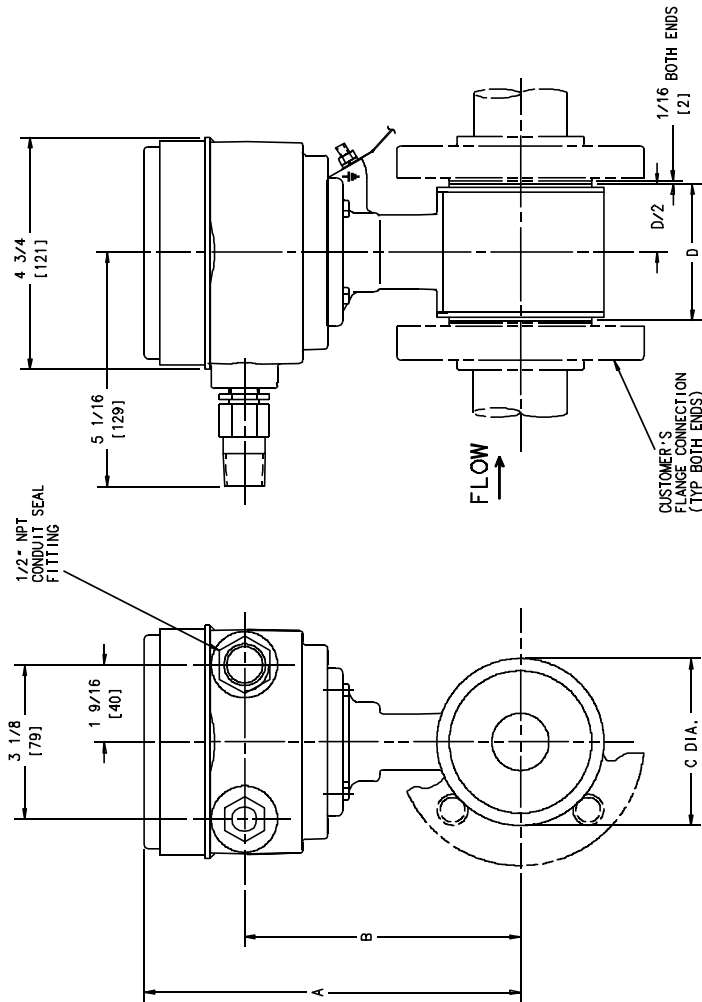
OUTLINE DIMENSIONS OF REMOTE FLOWMETER WITH 2-PIECE BOX
